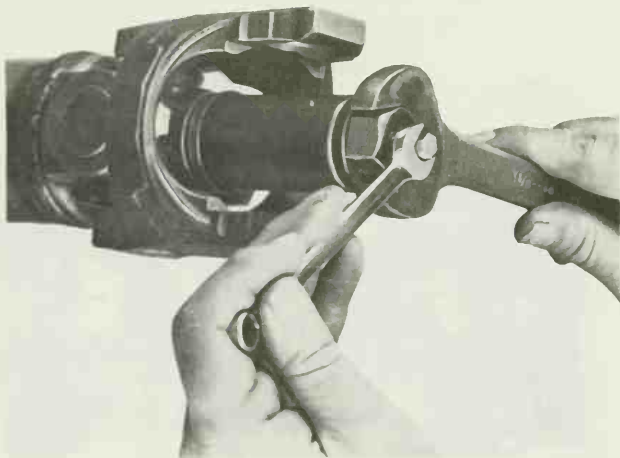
The centering ball is removed with a special puller. (GMC Truck and Coach Division of General Motors Corporation)
